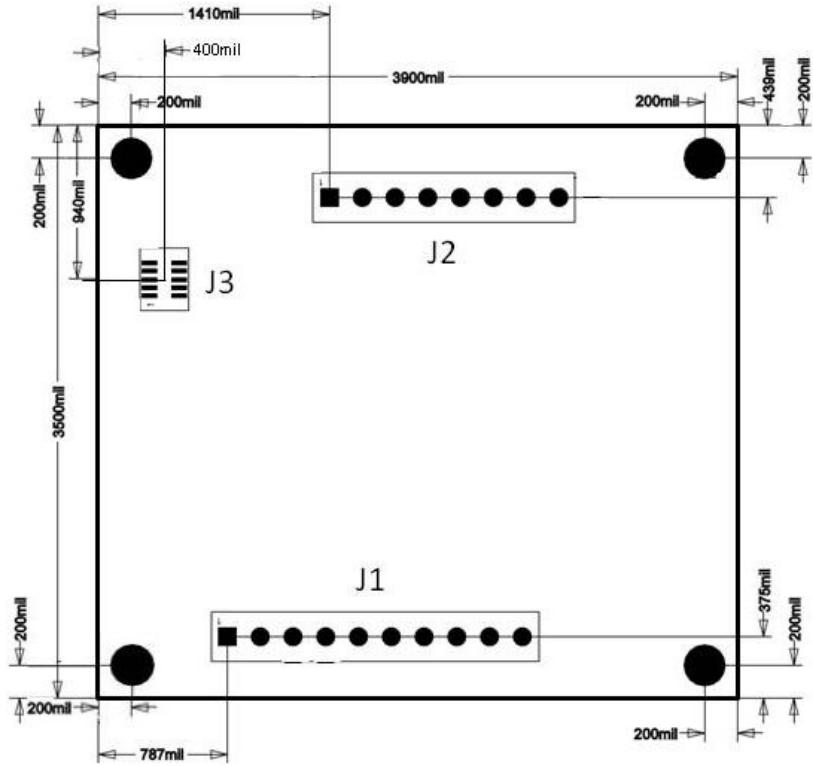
Power Module Mechanical Header and Mounting Hole Locations
